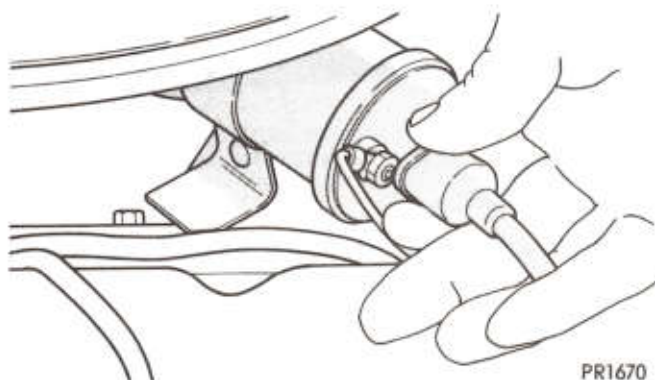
Installing Secondary Cable and Nipple at Coil Tower
